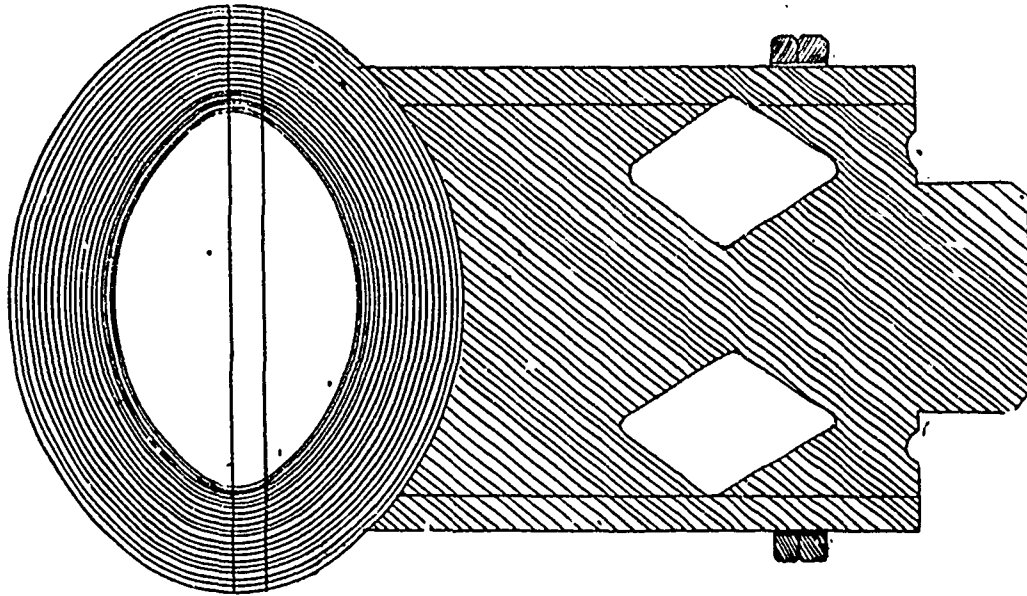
CHAMBER, SHOWING VALVE ATTACHED.
